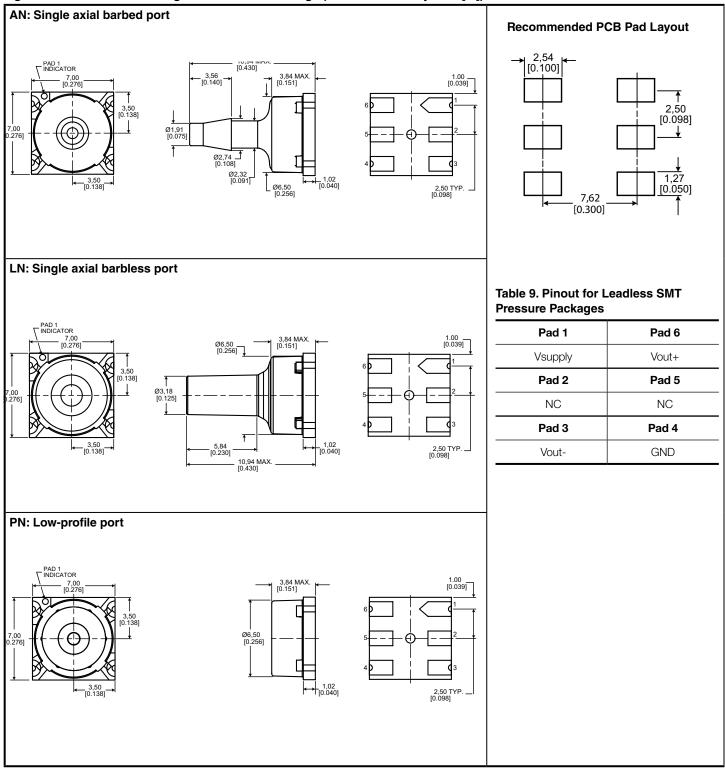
SMT Package Dimensional Drawings (For reference only: mm [in])
